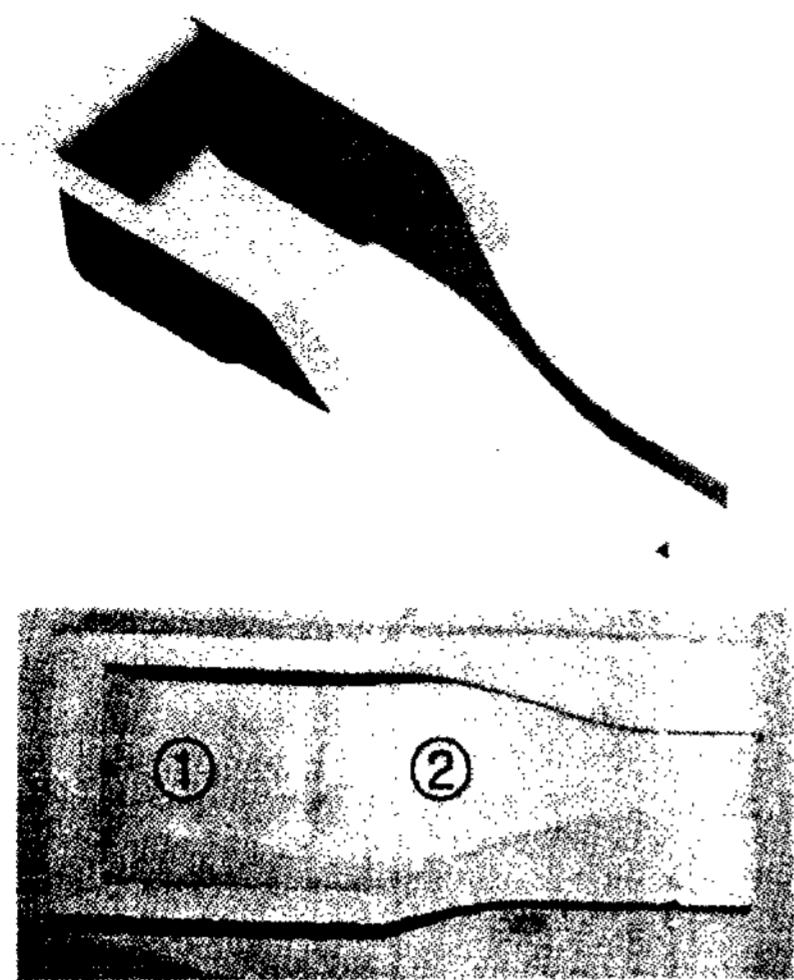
Tundish using this study. ① pouring basin and ② runner.
